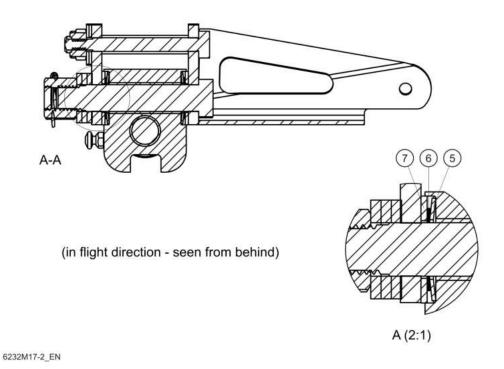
Arrangement of spring and shim washers on gimbal head – Version III
